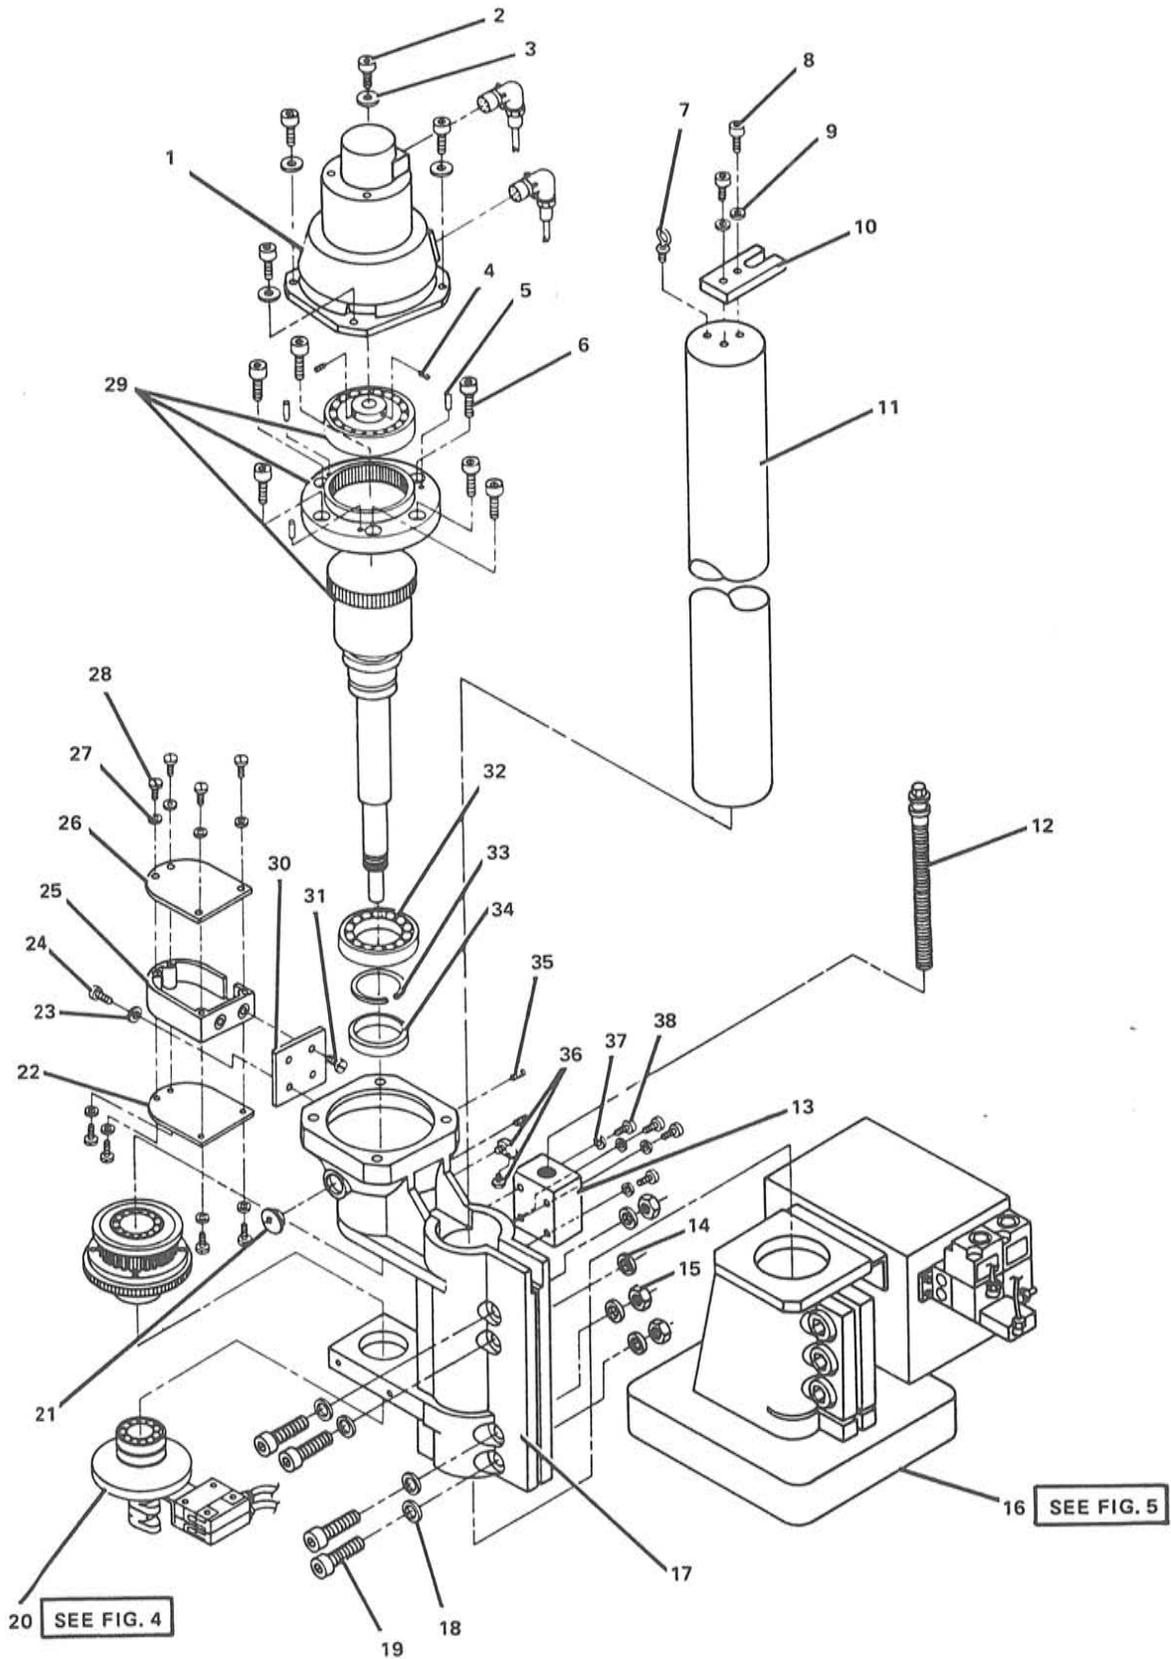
THETA ONE ASSEMBLY. SEE LIST 3.
